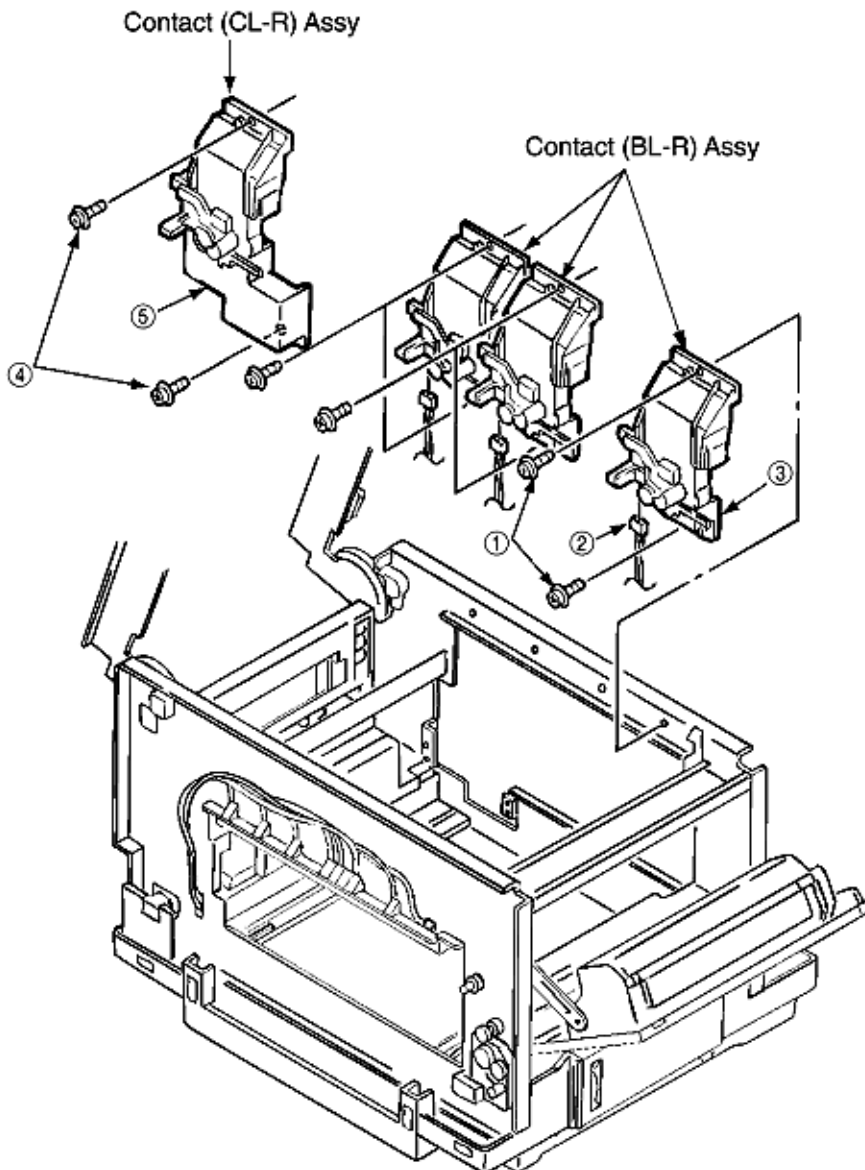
Contact Bracket (BL-R) Assy, Contact Bracket (CL-R) Assy
